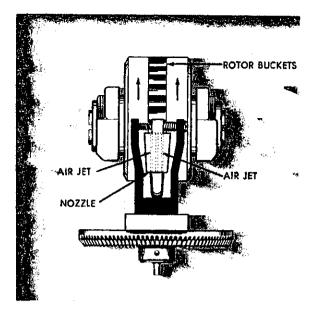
Erecting mechanism-vacuum-driven heading indicator.
